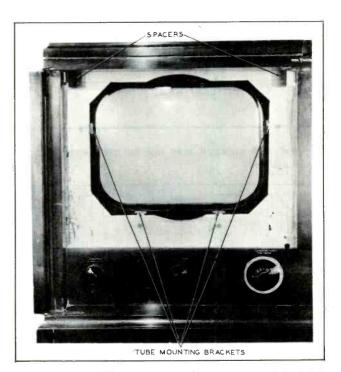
Sub-Panel Cutout and Tube Mounting Arrangement.
